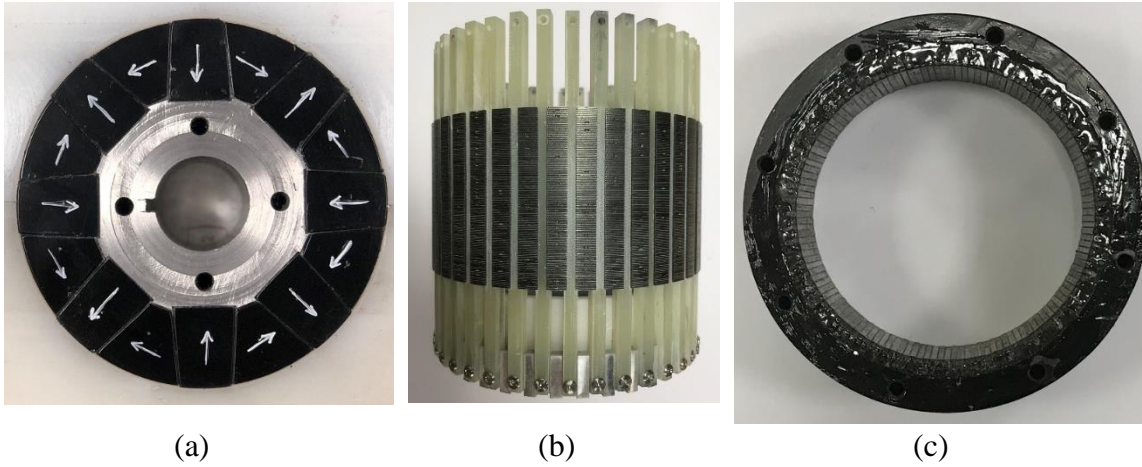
Assembly of the inner, cage and outer rotors, separate from the full assembly (stage 2) [139].
